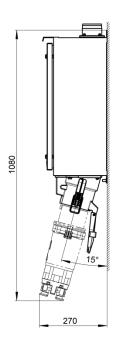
Dimensions, Connector Unit with Block Contactor CUBC C-Line (200A - 250 A) in m
